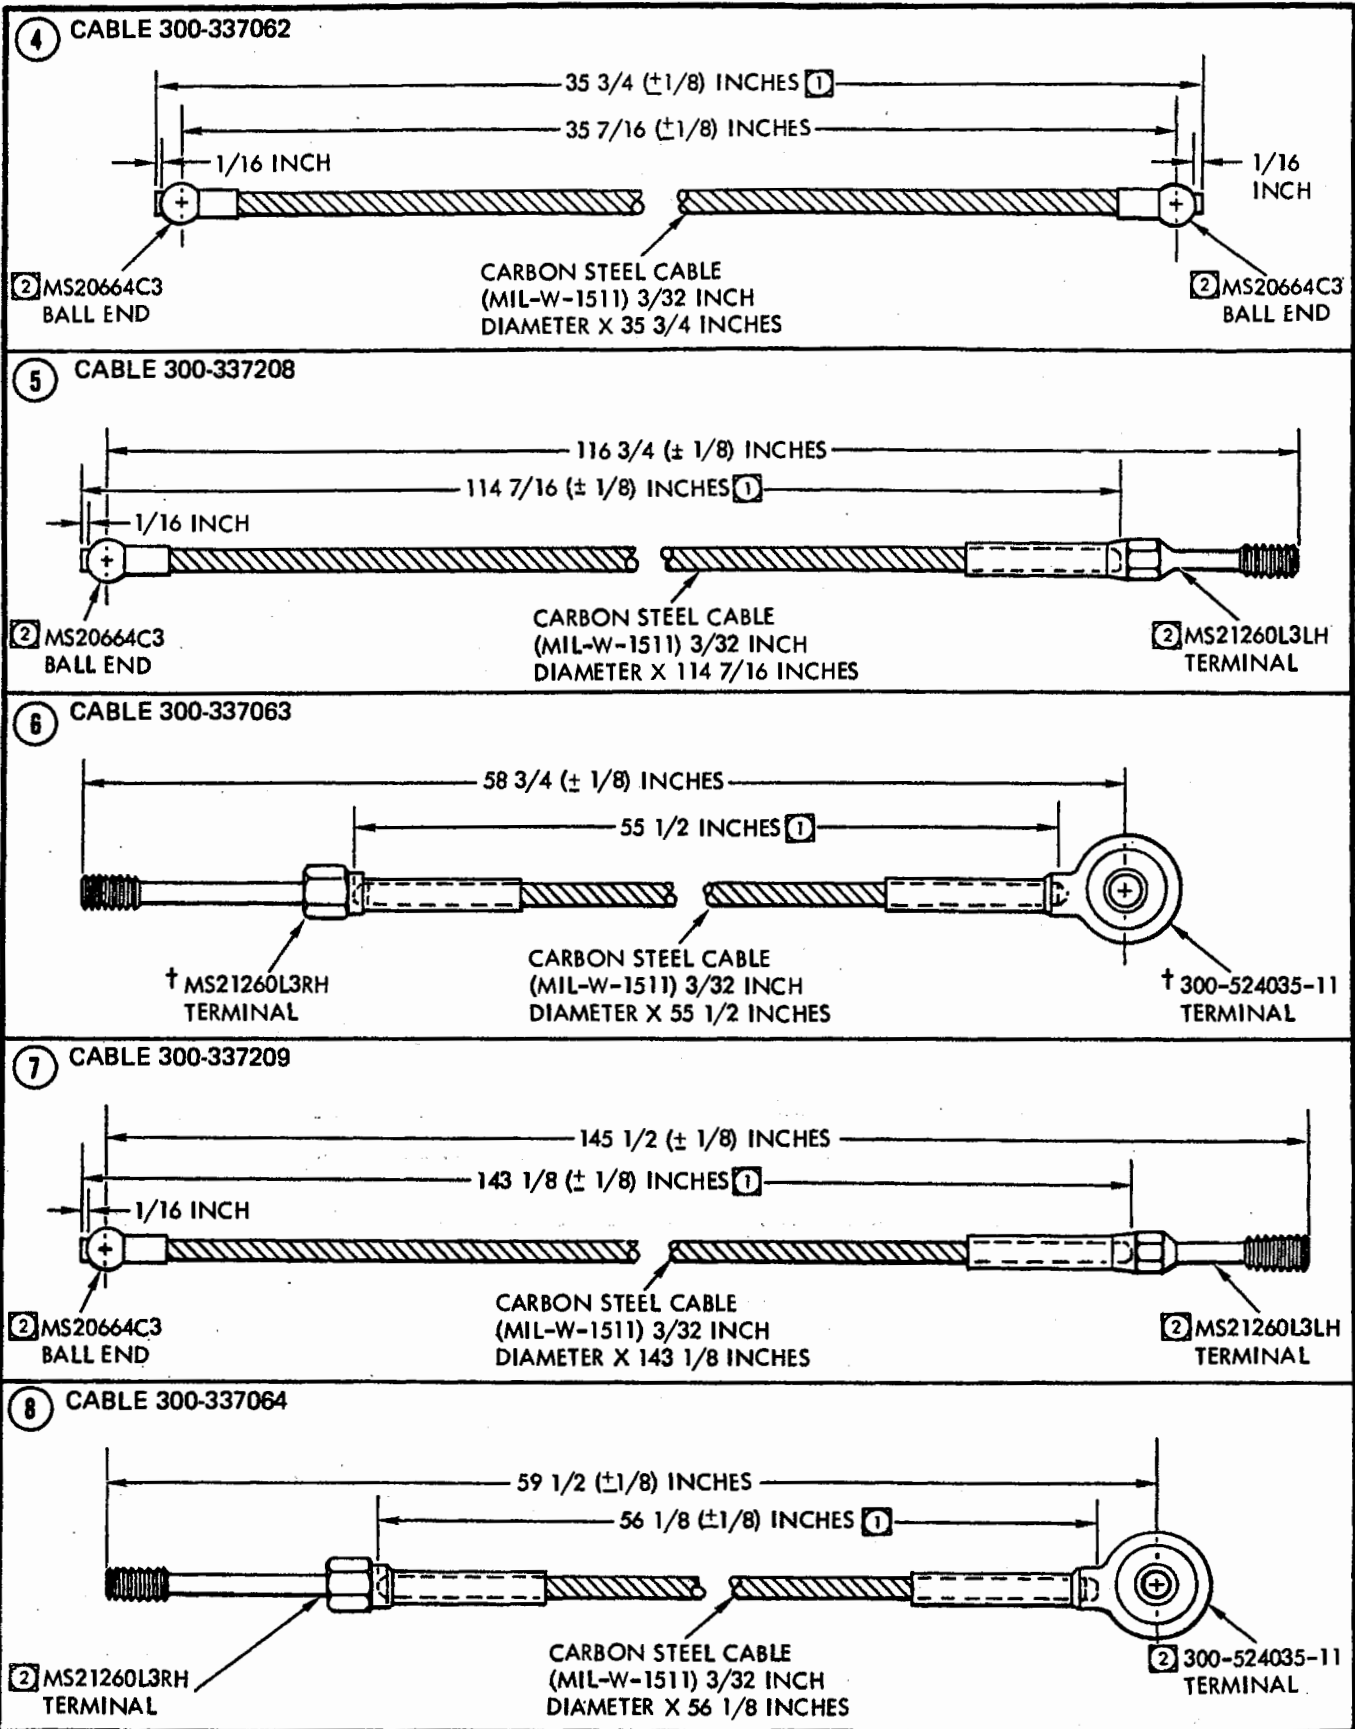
Landing Gear Control System Cable Fabrication (Sheet 2 of 2)
